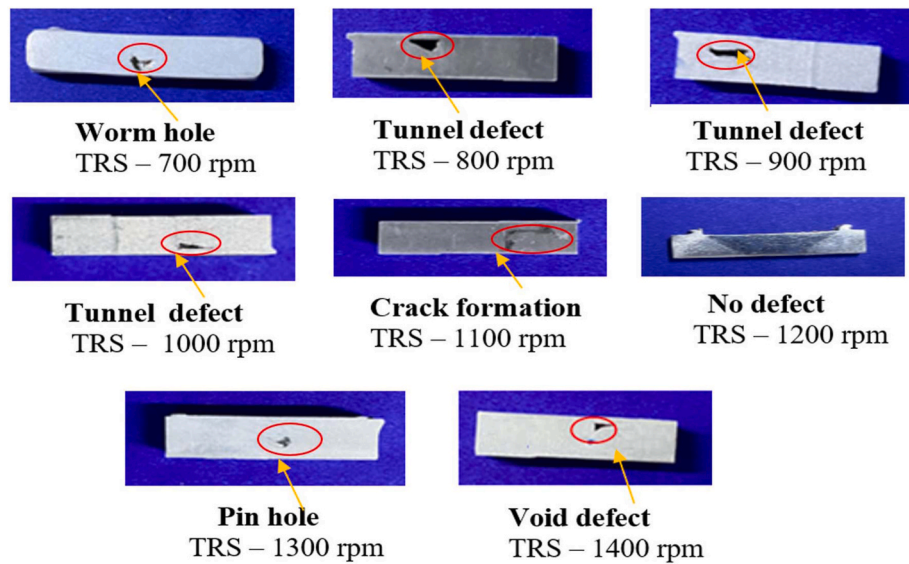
Weld cross-sectional defects are observed during trial-and-error experiments.
